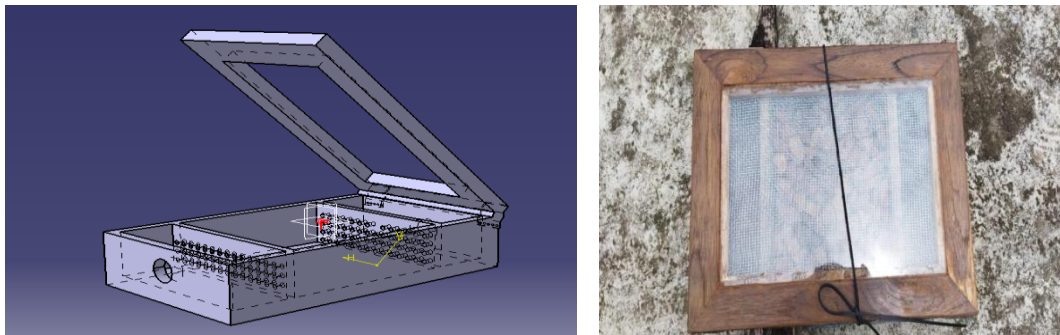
Bed and Wall of the TES, Transparent glass and Door hinges
